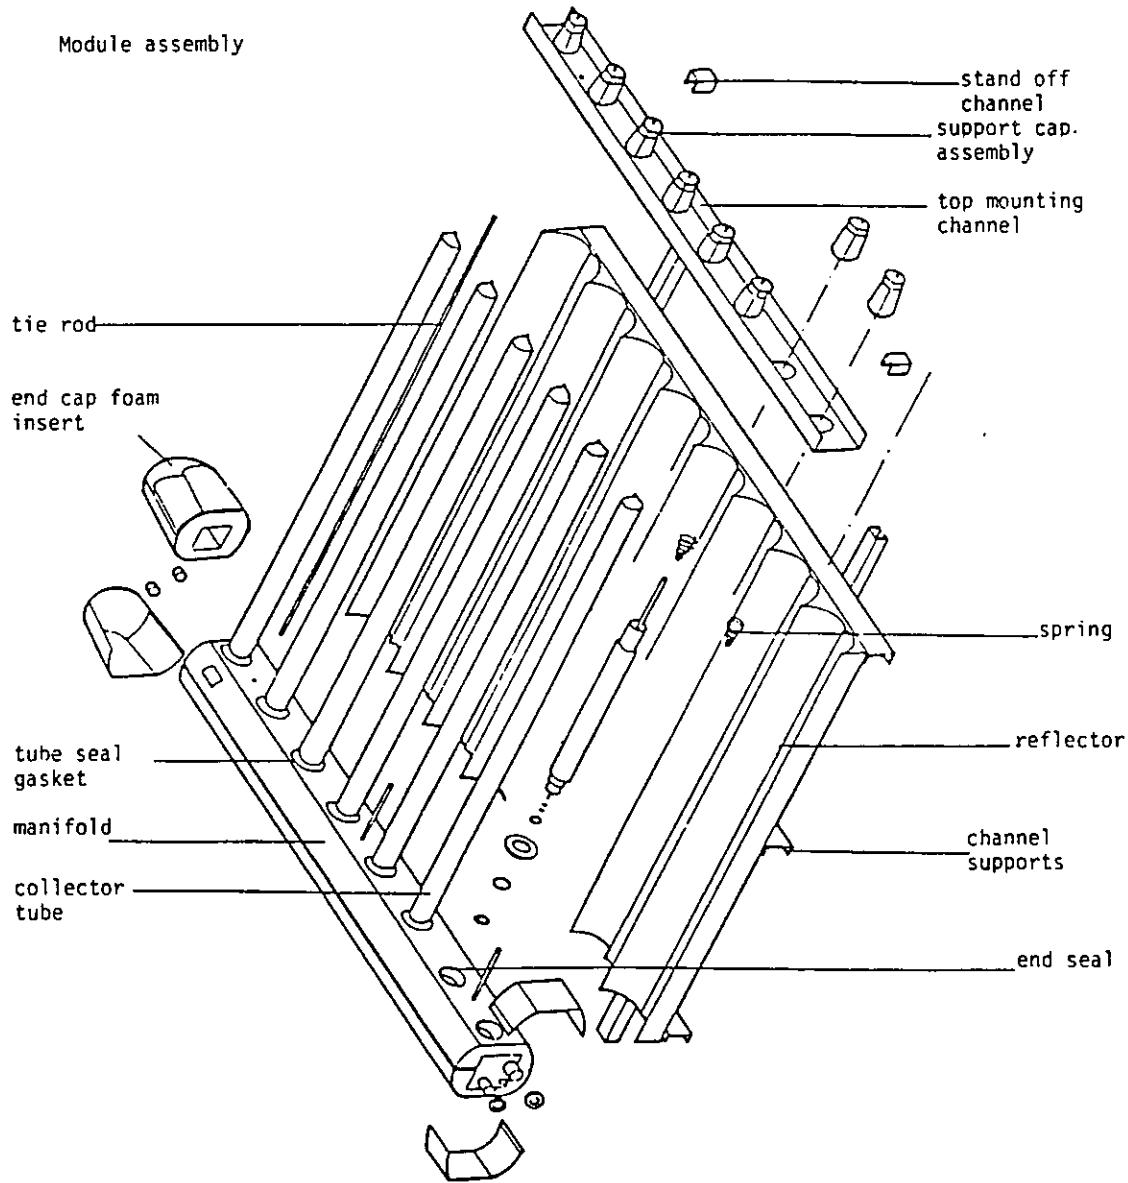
Module Assembly of the Solartech Collector, Mountain Spring Bottle Washing Facility, Canada.
